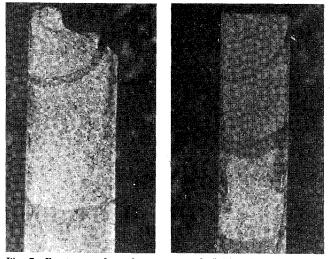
Fracture surfaces for countersunk (left) and straight-shank (right) holes.
